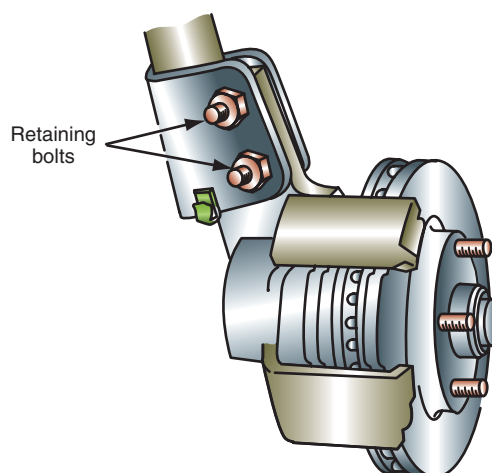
Lower end of strut installed in steering knuckle.
